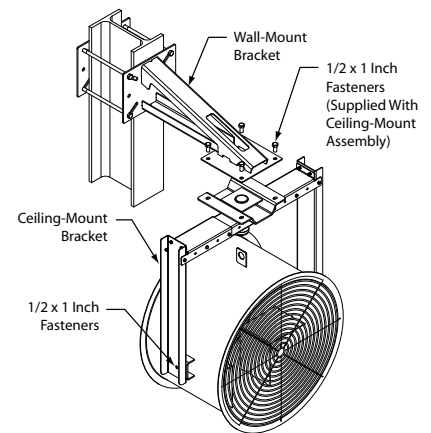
Wall-Mount Bracket and Ceiling-Mount Bracket Connection
